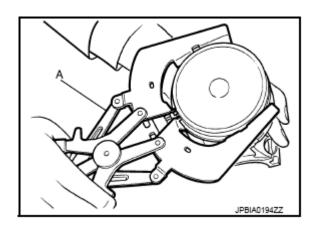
Removing Piston Rings Using Piston Ring Expander Courtesy of NISSAN NORTH AMERICA, INC.
